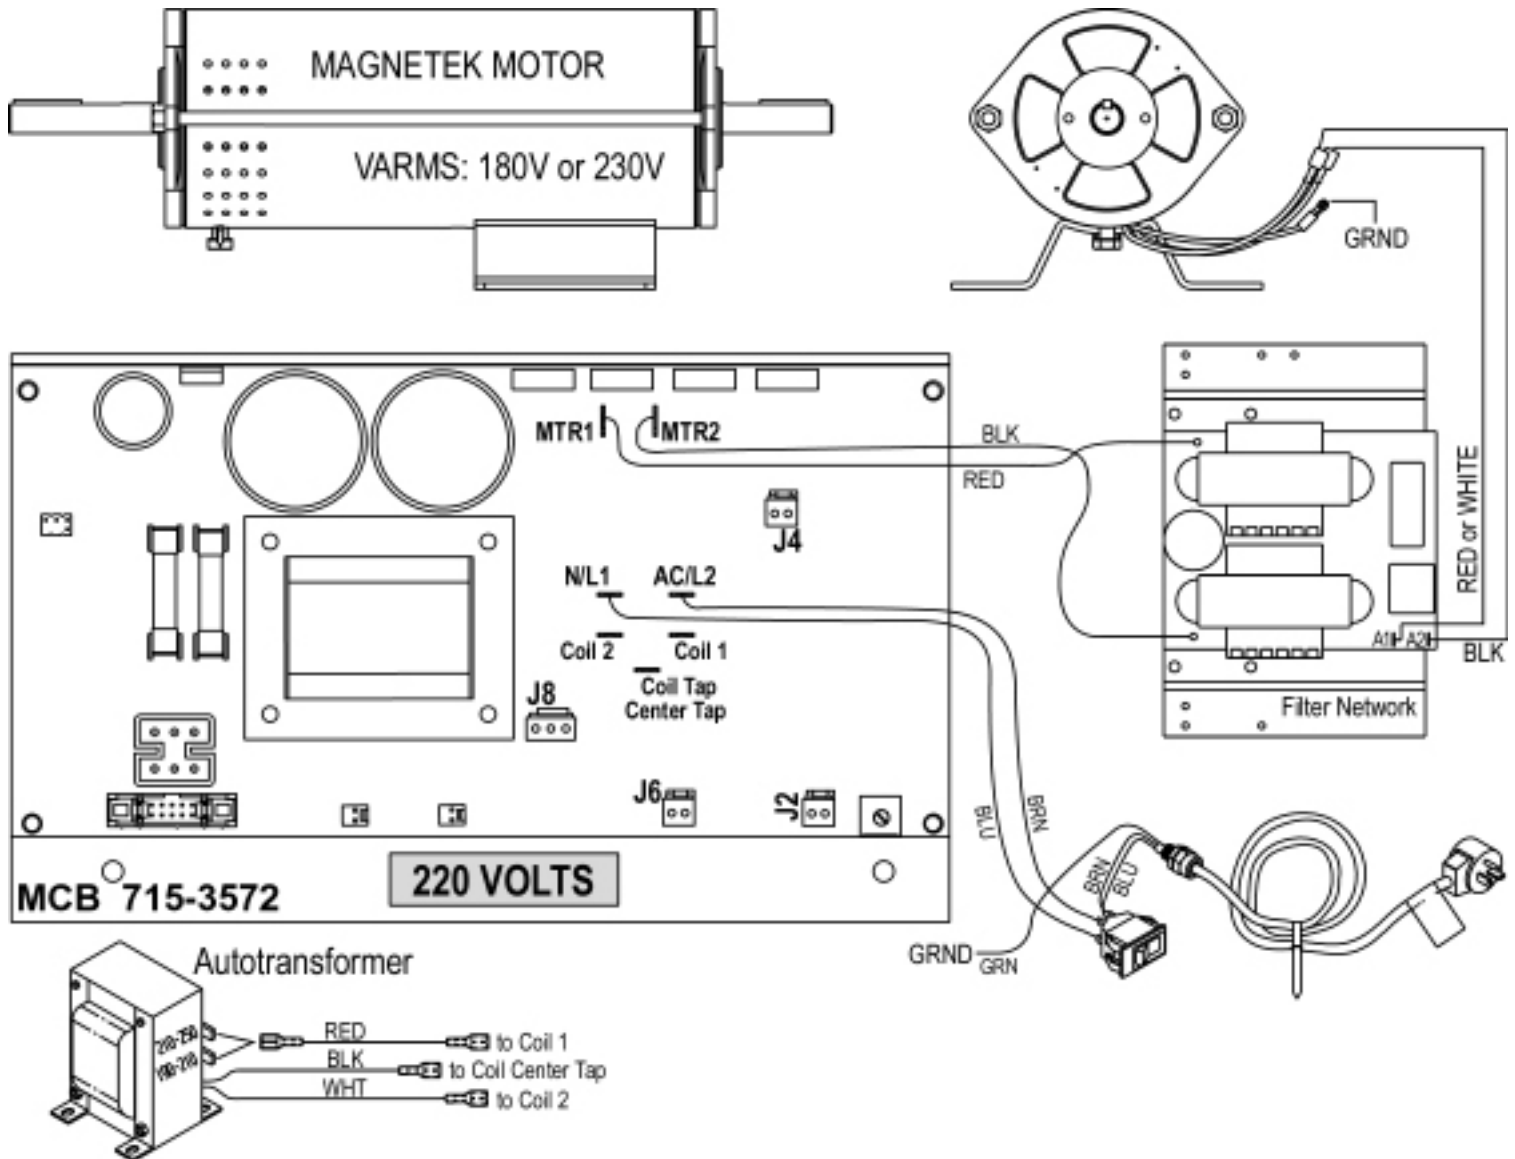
715-3572 MCB WIRING DIAGRAM WITH 220 VOLT MAGNETEK MOTOR 260-0905
